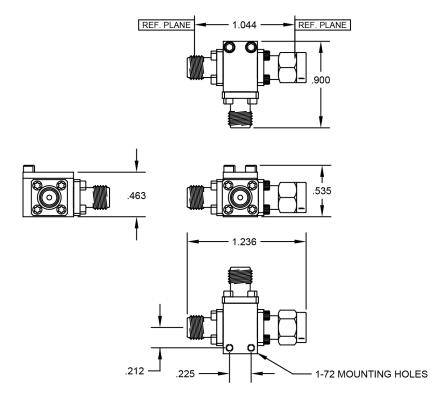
HL9462 mechnical drawing (opt. -JPJ)
